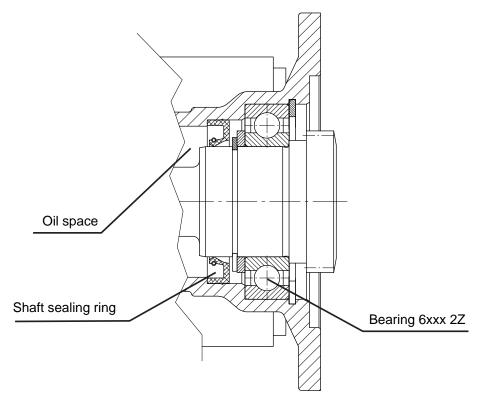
Drive shaft bearing and seal on the coupling side of universal worm gear units
